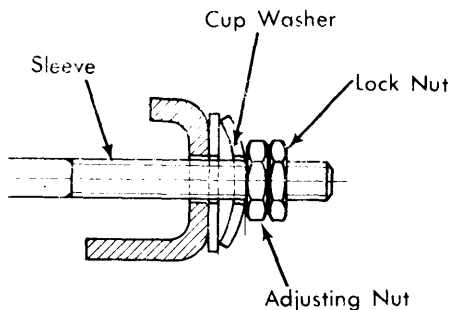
Sectional View of Parking Brake Adjusting Nut and Cup Washer
